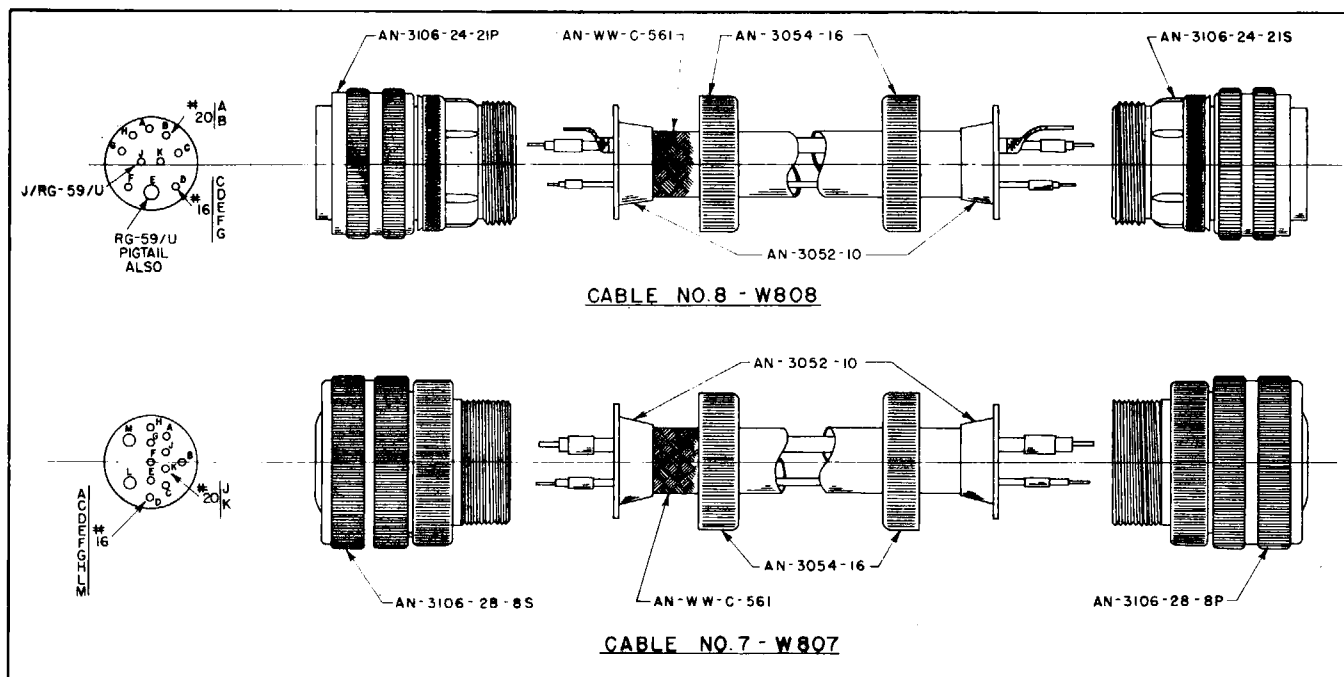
Cable Assembly—Cables No. 7 and 8
